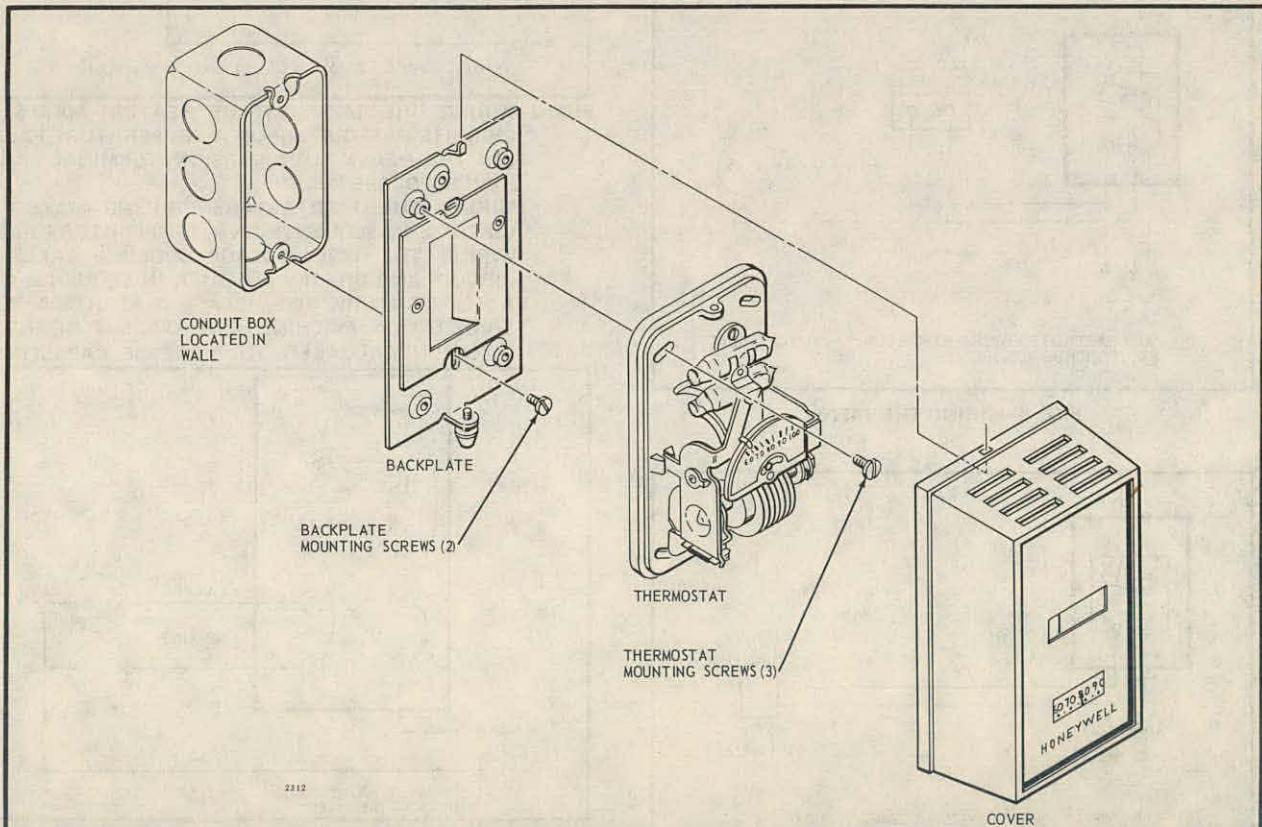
MOUNTING THE T42 ON VERTICAL OUTLET BOX. FOLLOW INSTRUCTION SHEET PACKED WITH BAG ASSEMBLY WHEN MOUNTING THE T42 ON A HORIZONTAL OUTLET BOX.
